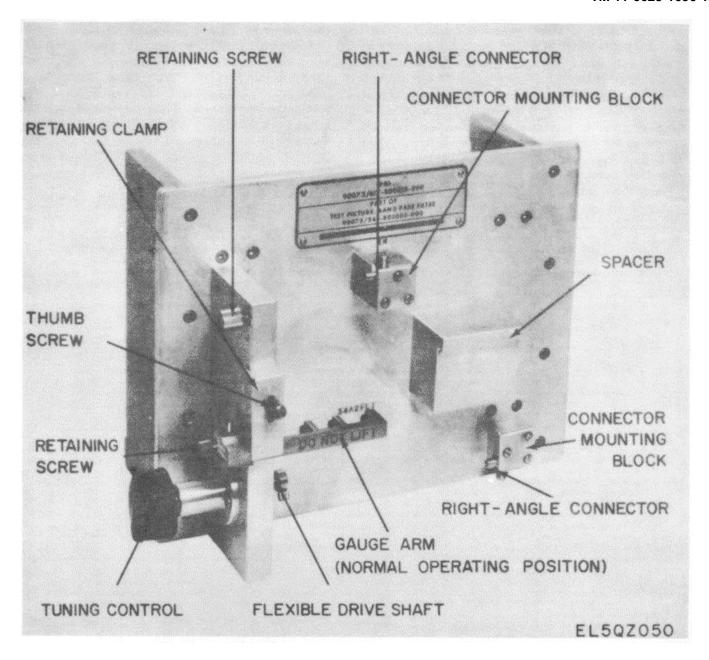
Bandpass Filter Test Fixture TS-3827/GRM-95(V)2.
